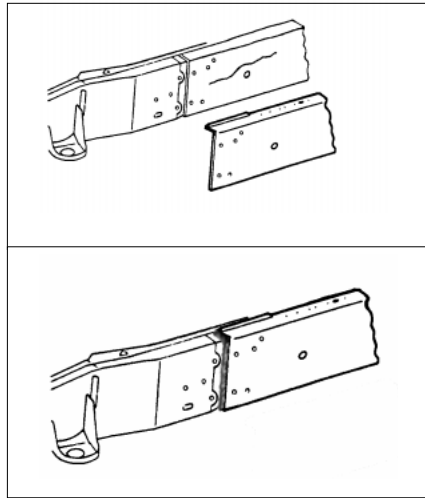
The reinforcement is welded to the outside of the stress-cracked rail. (Courtesy of Ford Motor Company)
